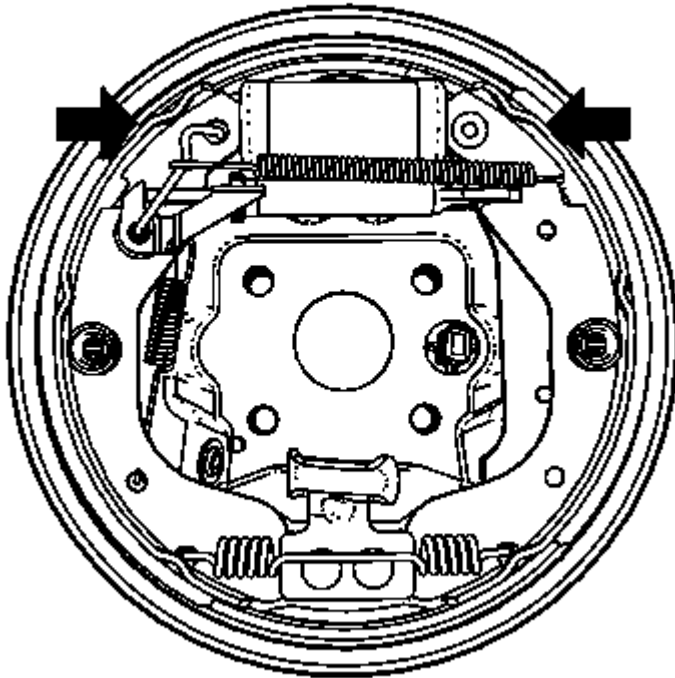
Wheel Cylinder Piston Boot sealing Areas
